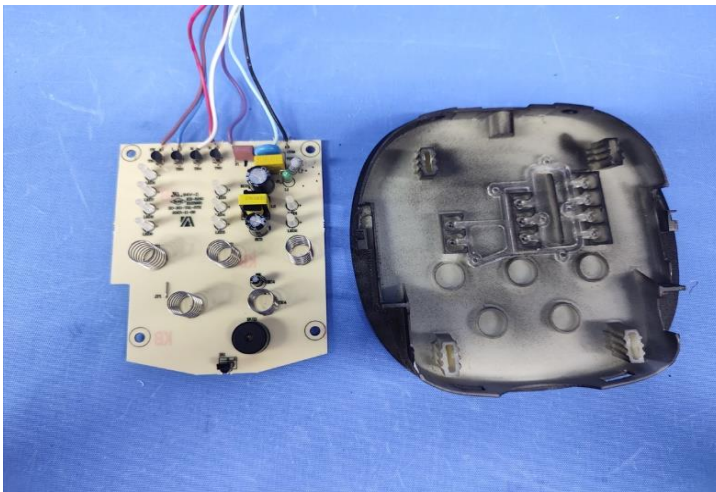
PCB view for NDTFT21RB and NDTFT21RBH
